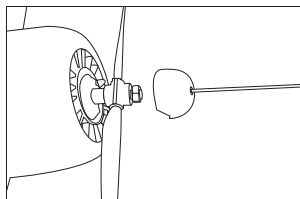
Screw out the screws with a hexagon socket screwdriver and remove the accessories.
